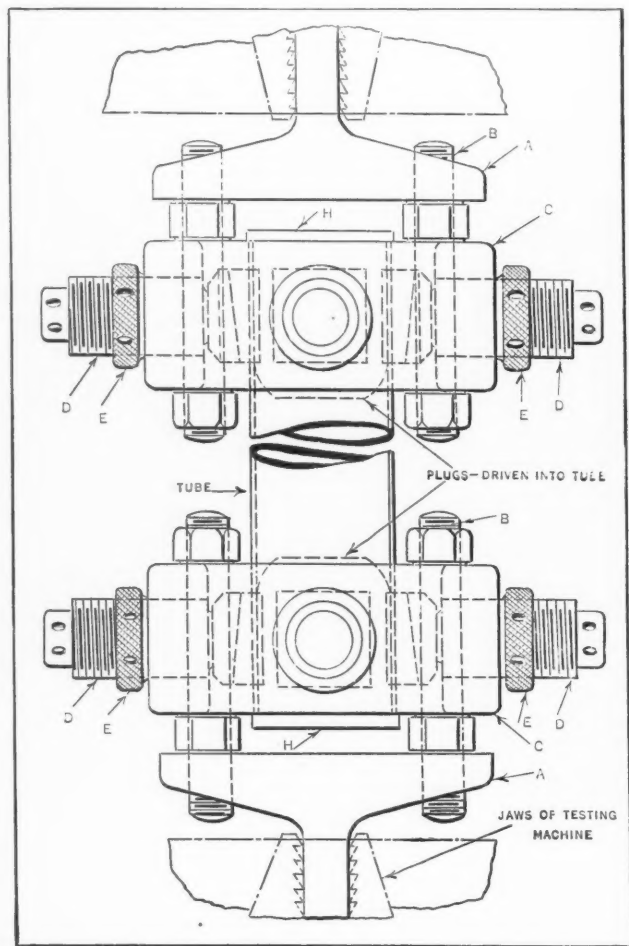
Jaws for Holding Large Pipe in Testing Machine
